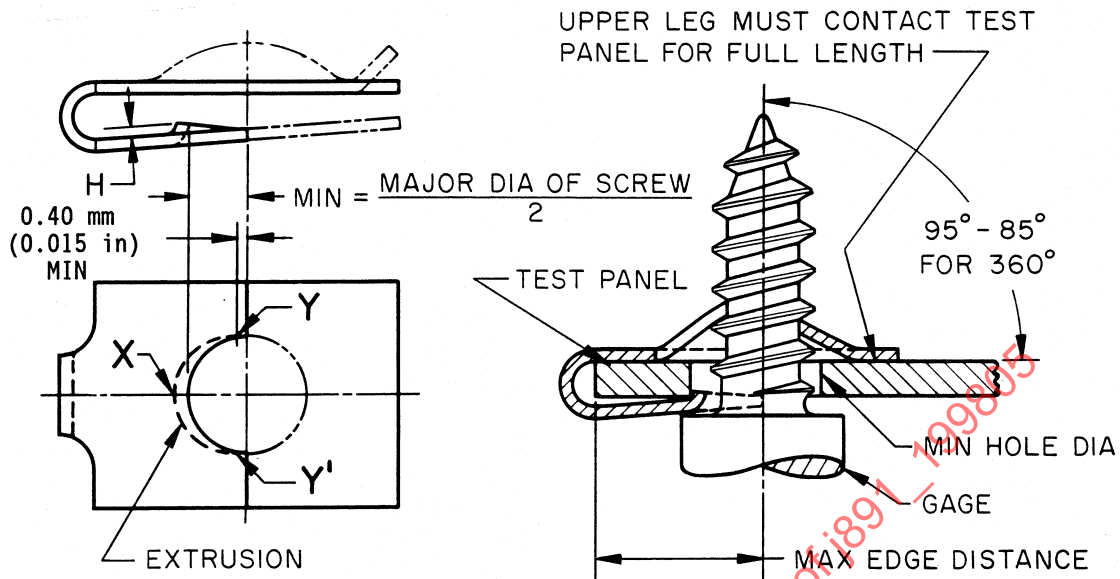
OPTIONAL EXTRUSION AND GAGING DETAIL
